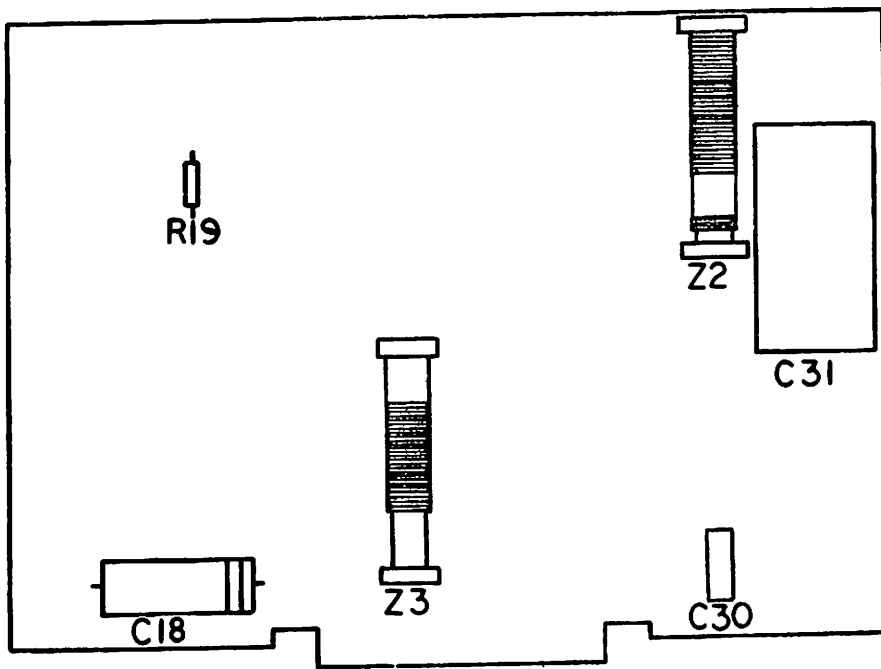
A. TWELVE INCH MONITOR - PCB 7256
